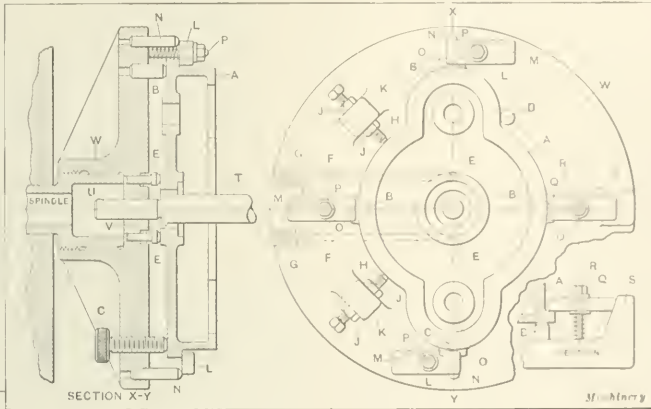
Fixture employing Three Fixed Locating Points *B* and One Adjustable Point *C
